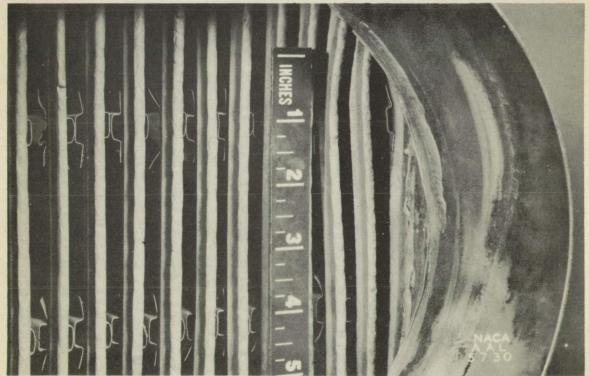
Views showing exhaust-gas side of right inboard heat exchanger after 173 hours of flight testing, C-46 airplane.
